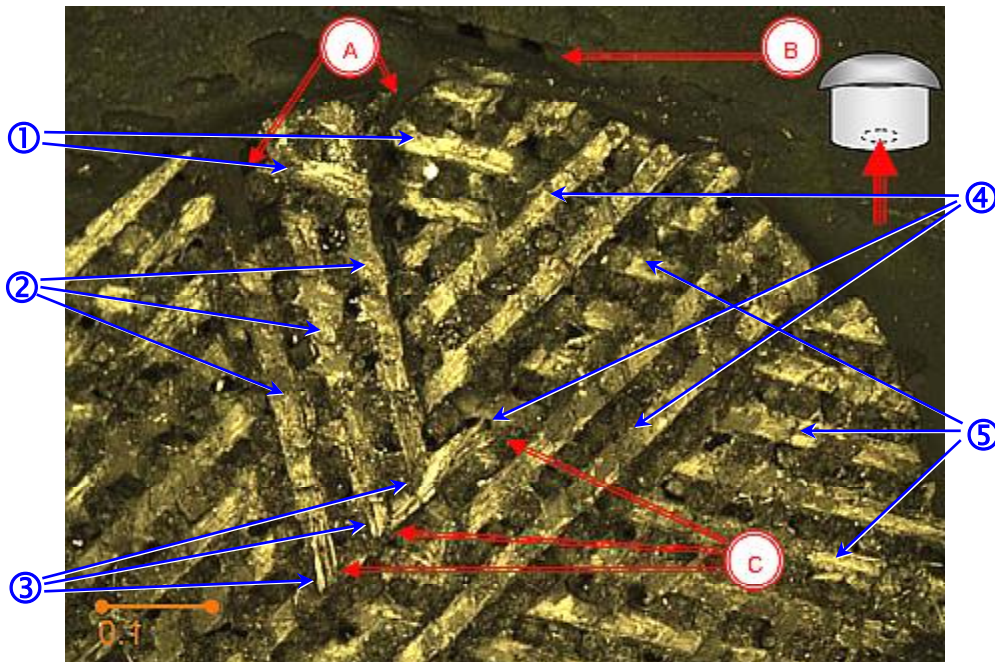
Image of one of the fracture surfaces in the second failure near the shaft-to-head interface.
